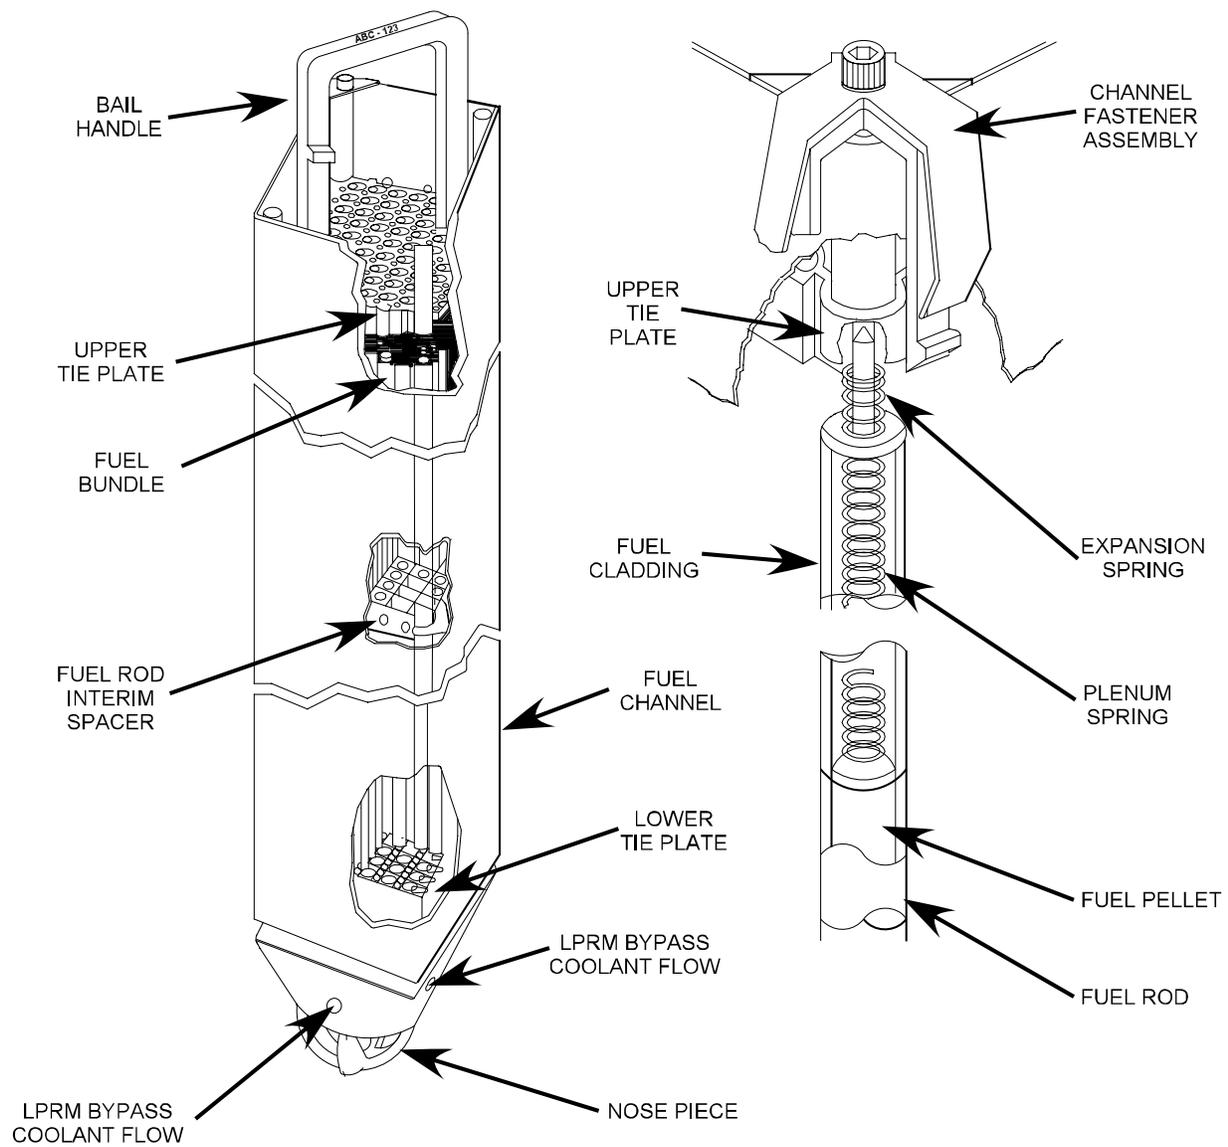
Fuel and Channel Fastener Assemblies
